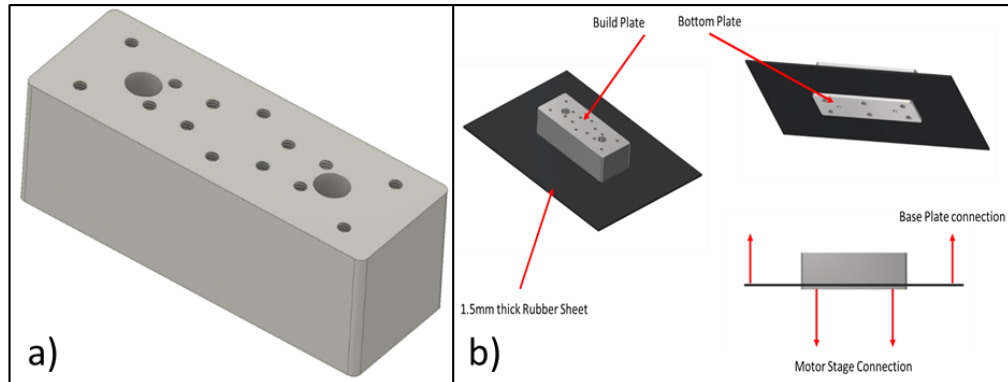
a) 3D CAD model of the build plate, b) illustration of build plate, rubber sheet and bottom plate assembly to aid in sealing the system.
